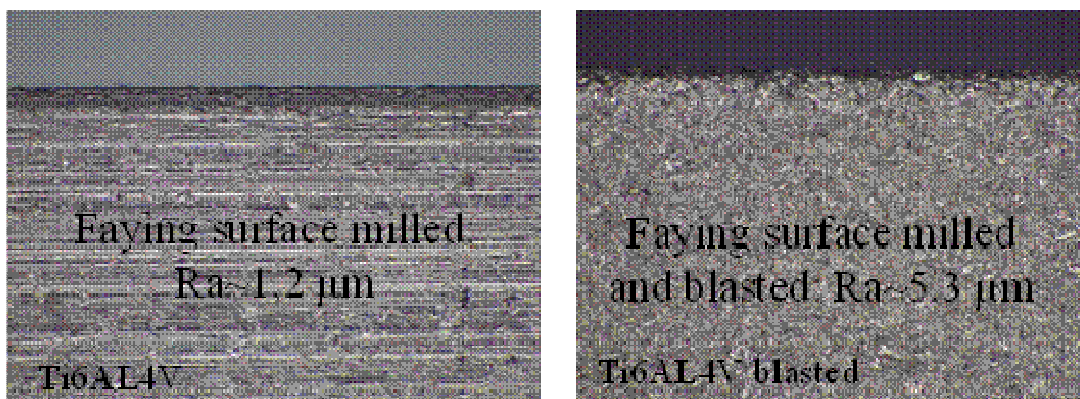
Surface preparation of Ti before welding: left milling; right milling and steel shot blasting
